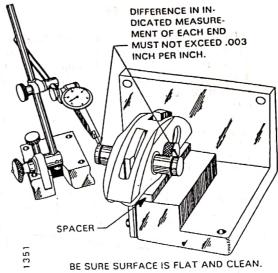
Checking Parallel and Squareness of Counterweight Bushings with Gage Fixture ST-91 — Horizontal Position
